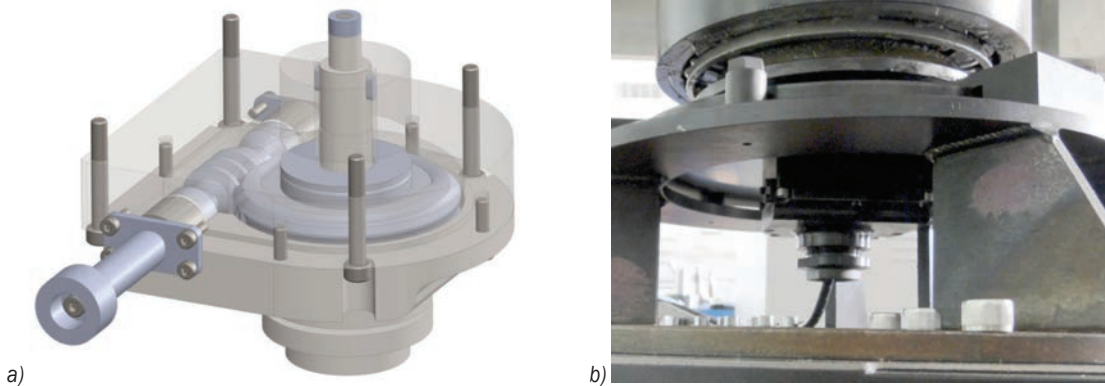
a) Model of the assembly height measuring unit, and b) location of the assembly height measuring unit
